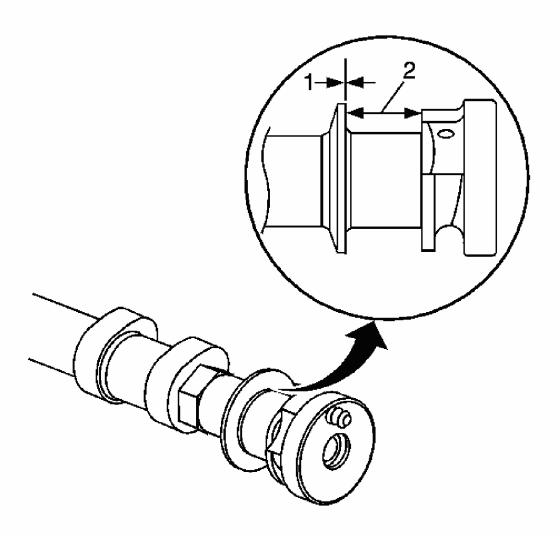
Measuring Camshaft Thrust Wall Width & Surface Runout Courtesy of GENERAL MOTORS CORP.
